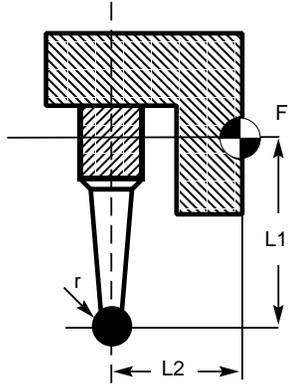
Workpiece probe type 7 in the TOA memory for turning machines
